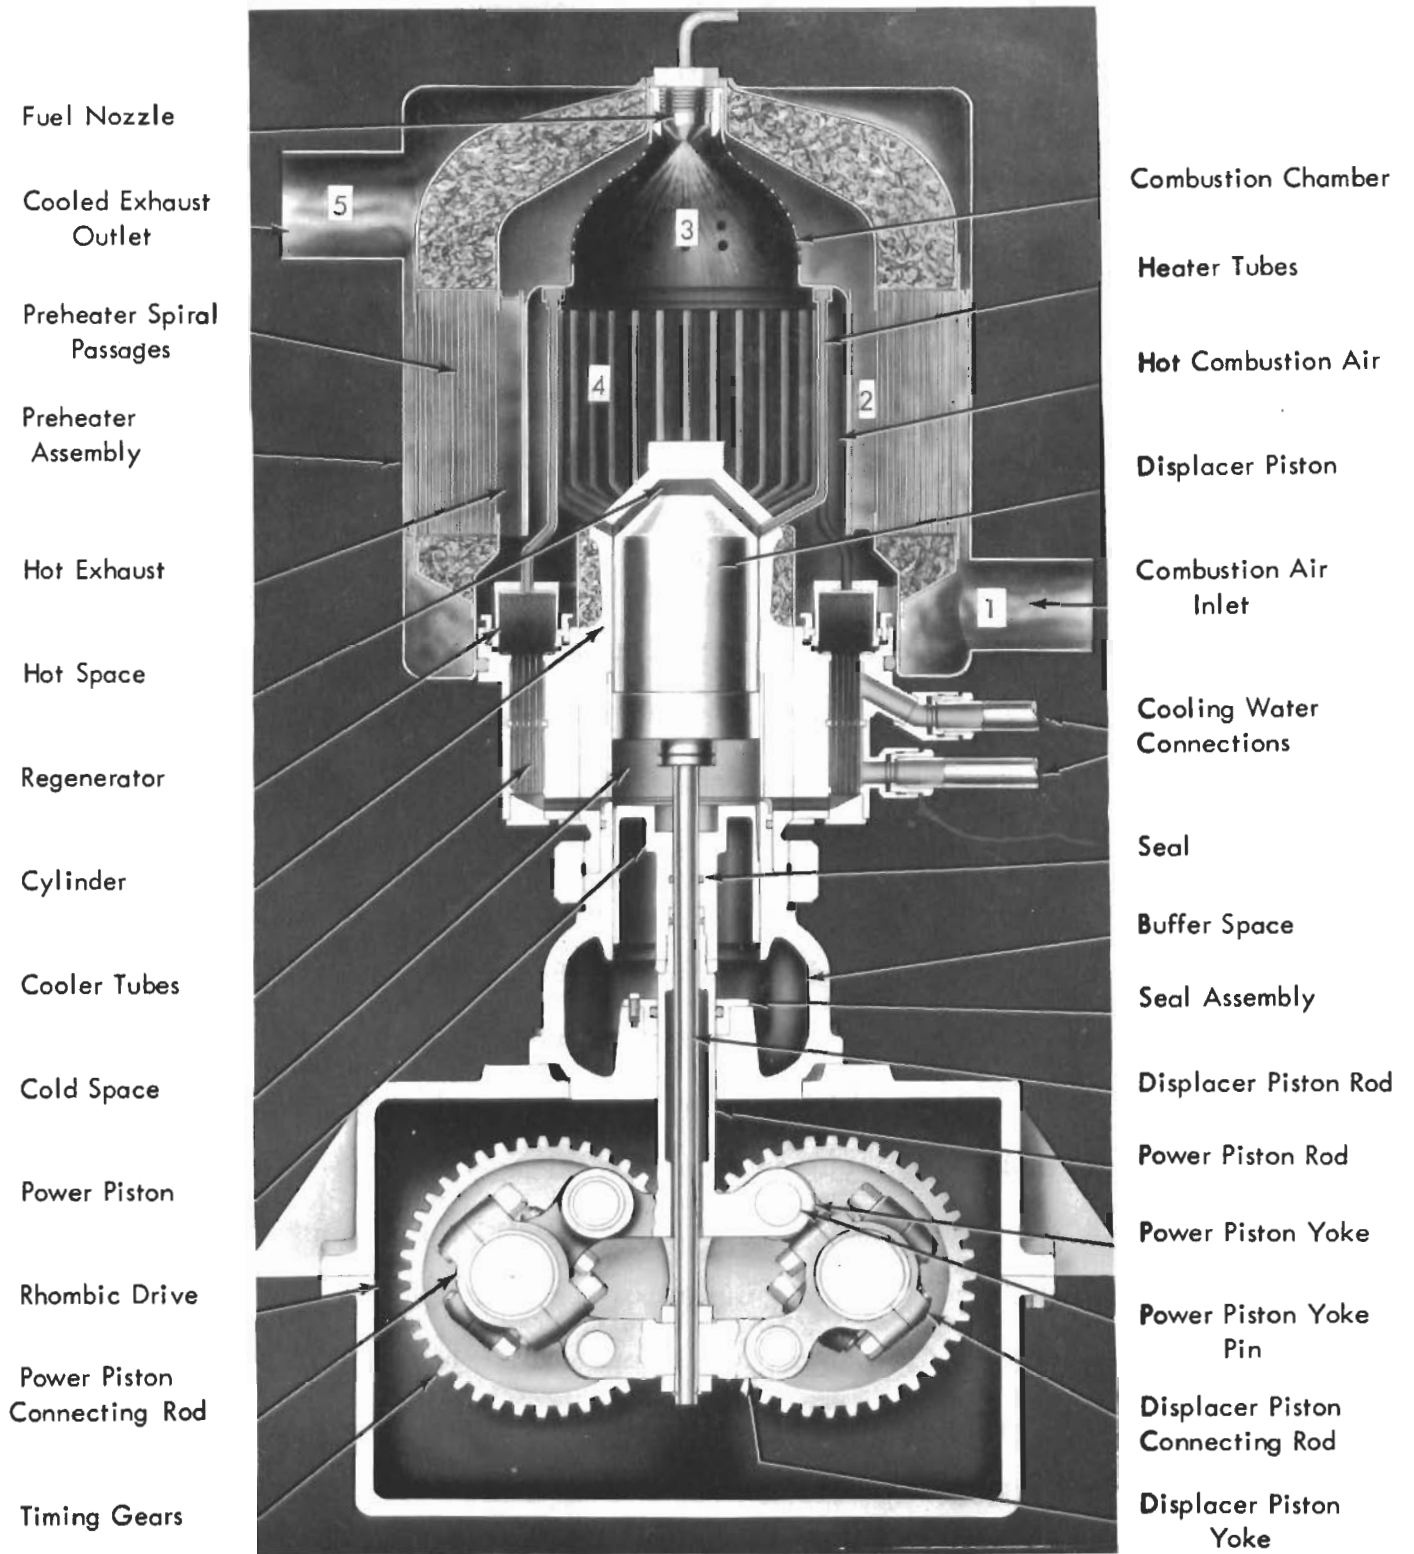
STIRLING THERMAL ENGINE SCHEMATIC DRAWING
